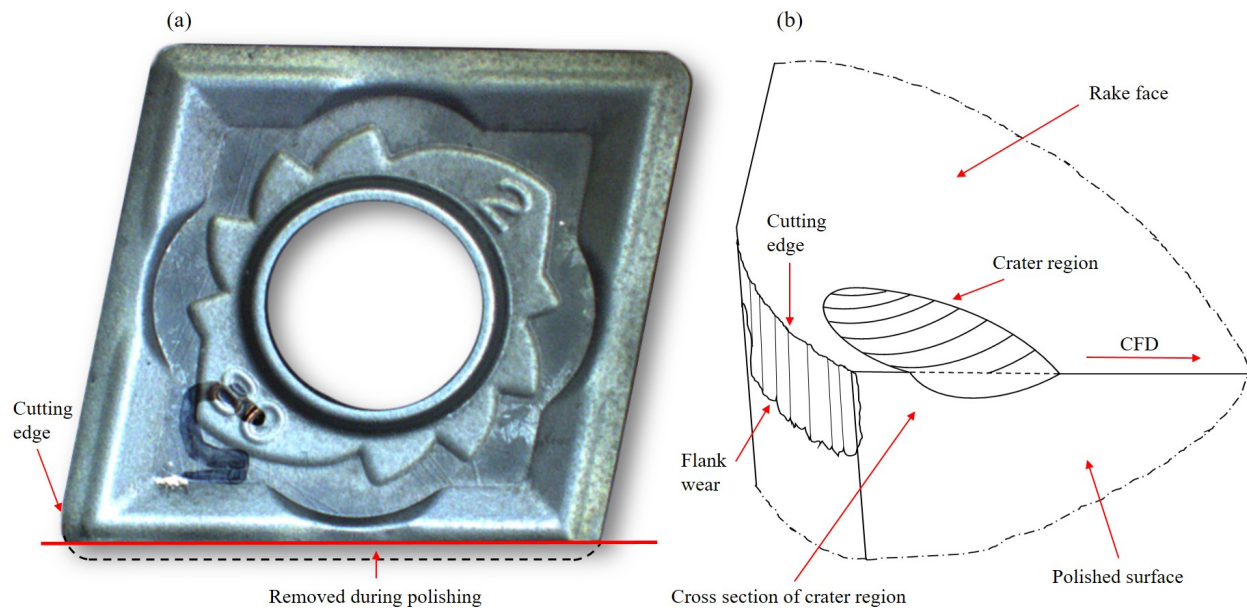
(a) - A modified photograph of the cutting insert with the section removed via polishing highlighted. (b) - A schematic diagram of the tool corner showing the polished surface, crater region, cutting edge, flank wear and chip flow direction (CFD) [127].
